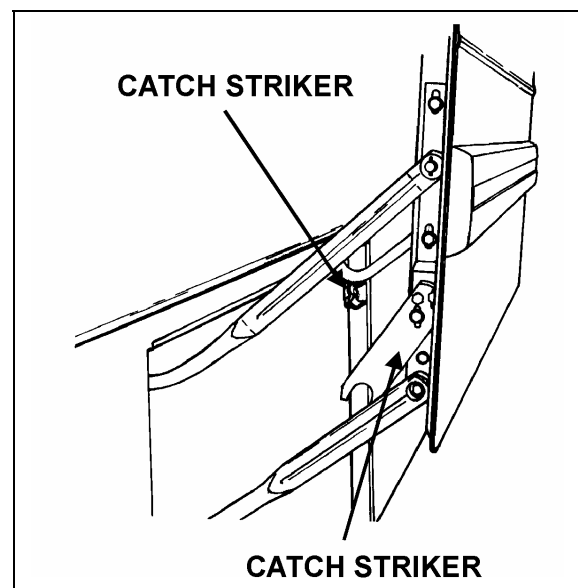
BAGGAGE DOOR CATCH STRIKER 18146
